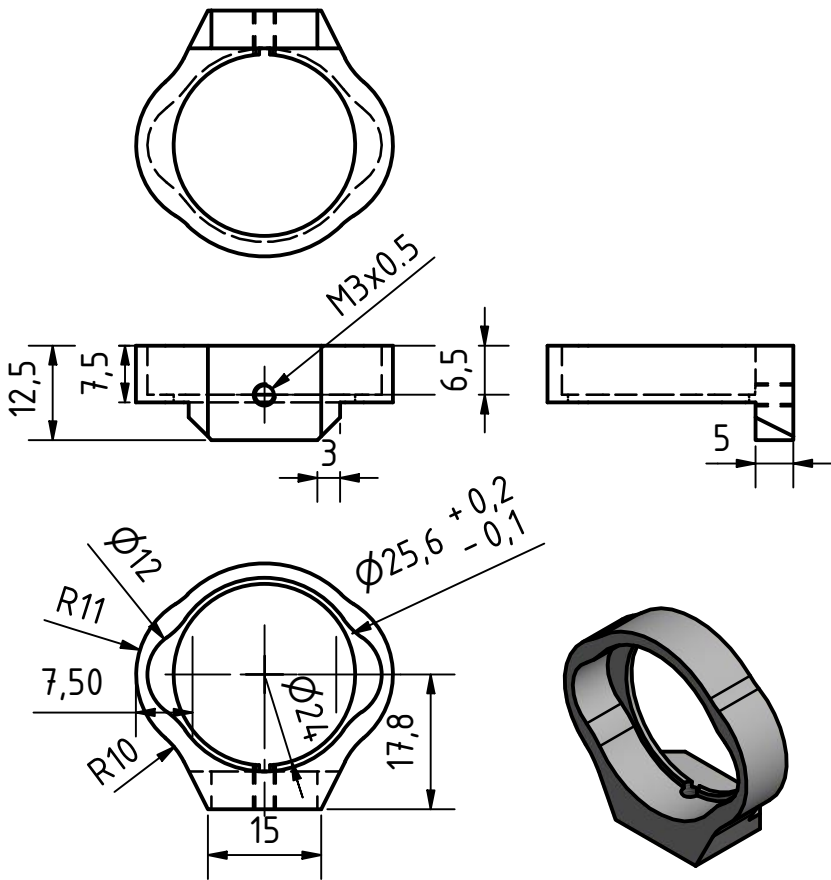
Technical drawing of the strain free wedge beam splitter holder.
